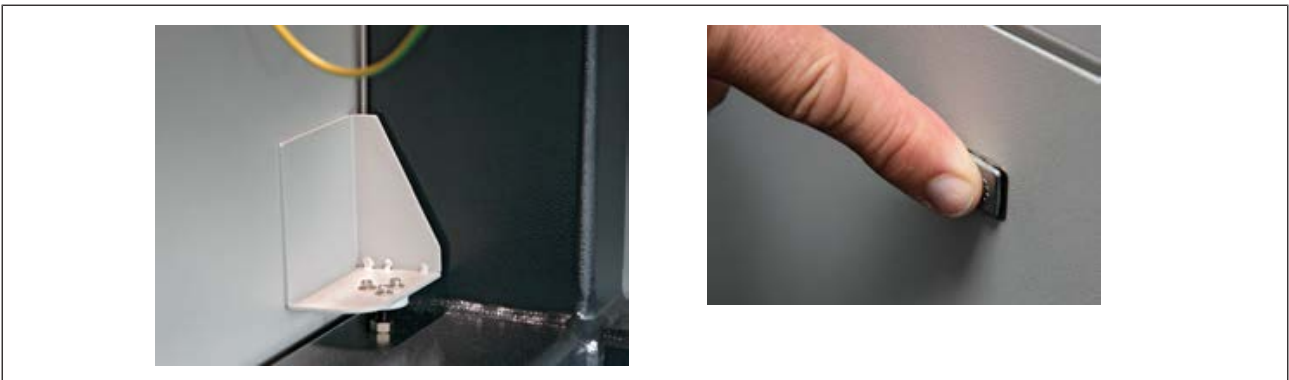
Fit the bottom side panel and press on the closures on the outside
